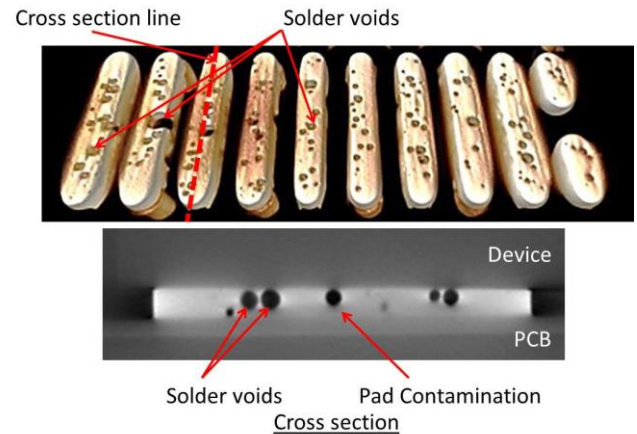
3D-X-ray (top) of an eGaN FET showing excessive solder bump voids. Contaminant on the pad to solder interface leads to voids formation (bottom)
